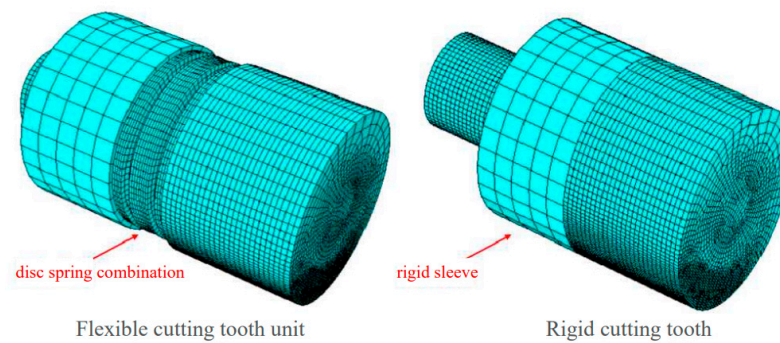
Mesh division of flexible cutting-tooth unit and rigid cutting tooth. (Scale: 1.5:1).
